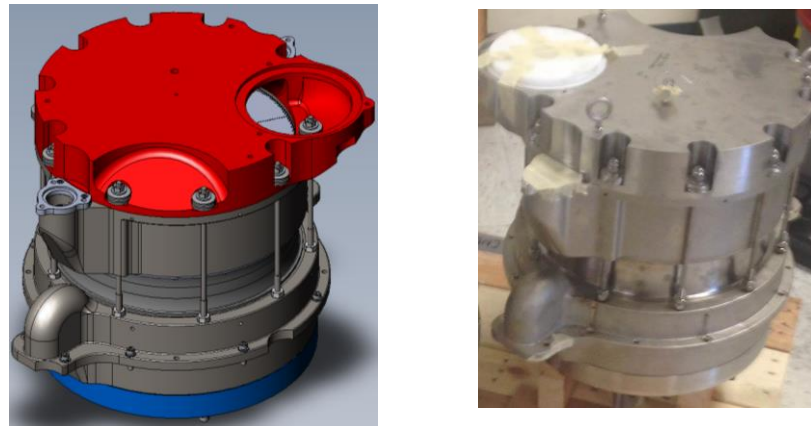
CAD design (left) and as-built hardware (right) of a full heat exchanger stack.
